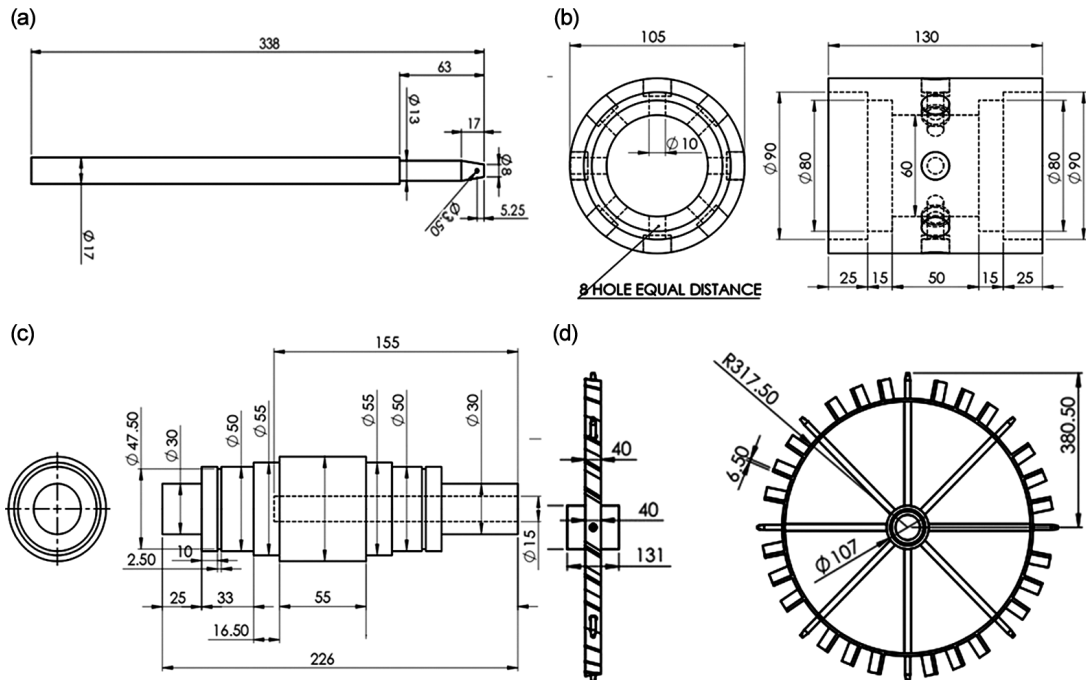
Different components of wheel a) injector; b) hub; c) circular shaft; and d) wheel (all dimension in mm)
